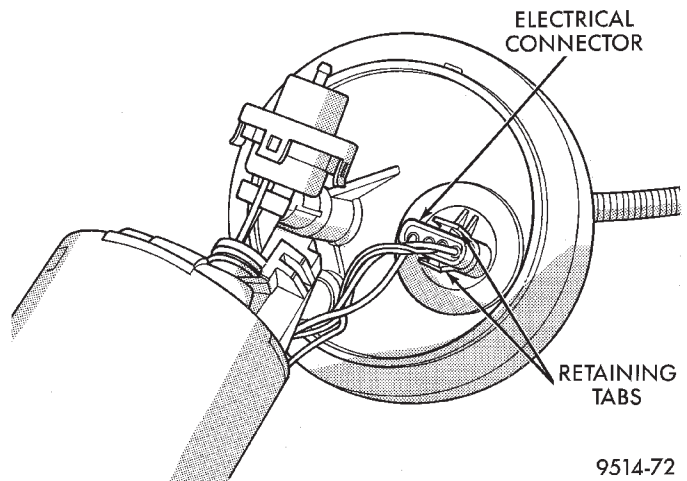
Fuel Pump/Level Sensor Electrical Connector
